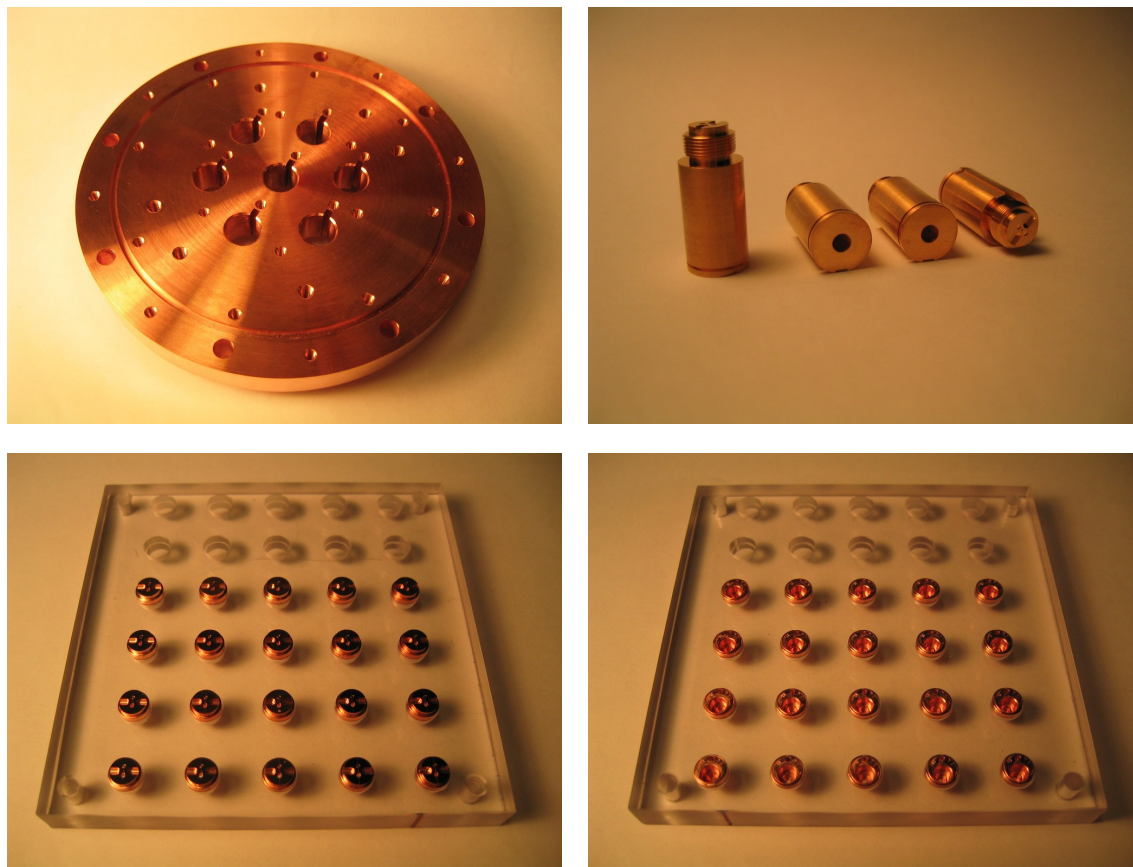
Manufactured parts for the CHAMP+ low band array. Left to right, top to bottom: mixer clamp plate; corrugated horns; mixer back pieces front view and back view.
